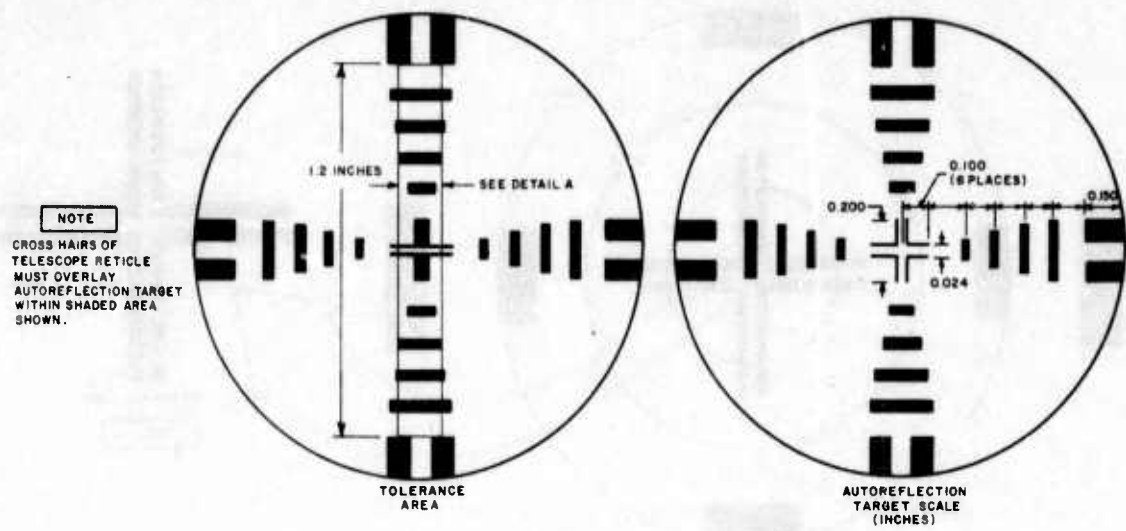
Antenna Assembly Fixture Boresight Tolerance.
